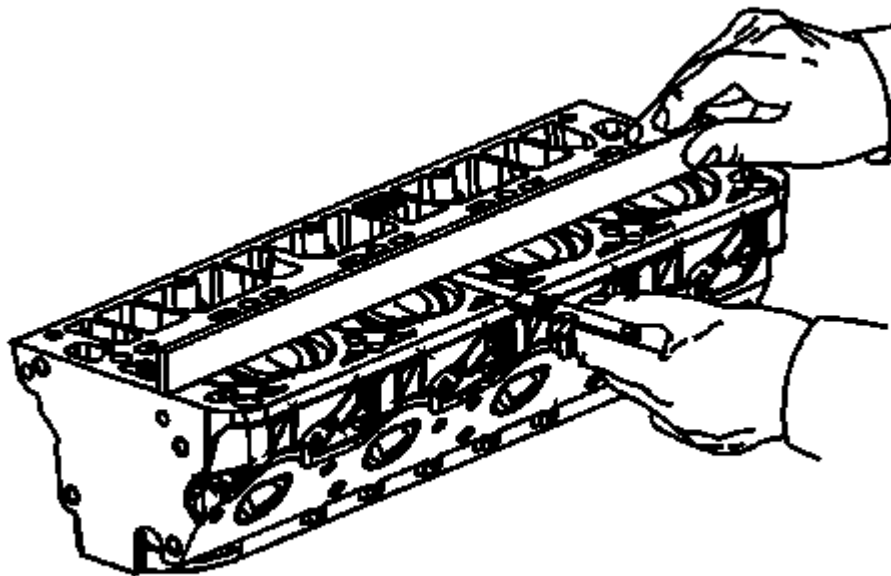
Inspecting Cylinder Head For Warpage
